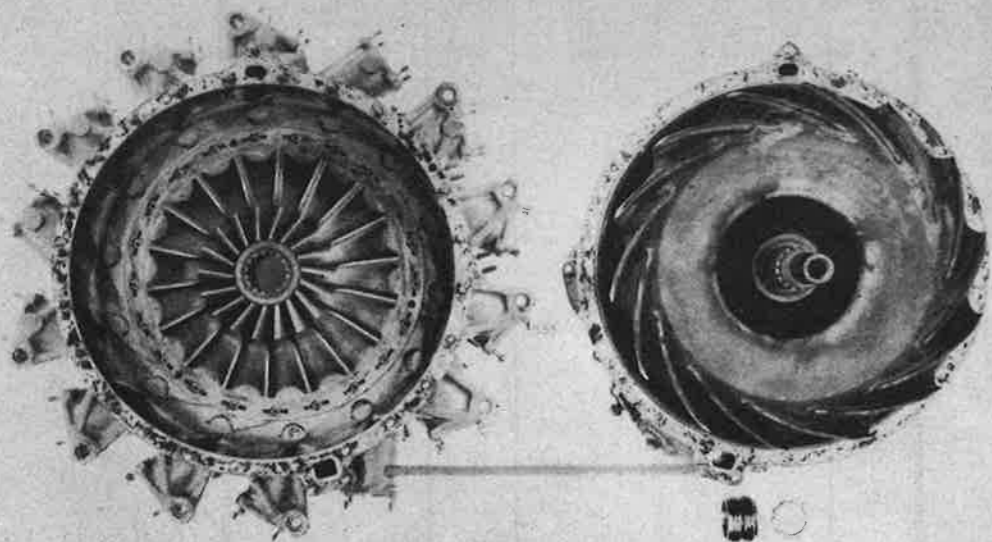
Blower Case, Impeller, and Diffuser (SER-2963).
